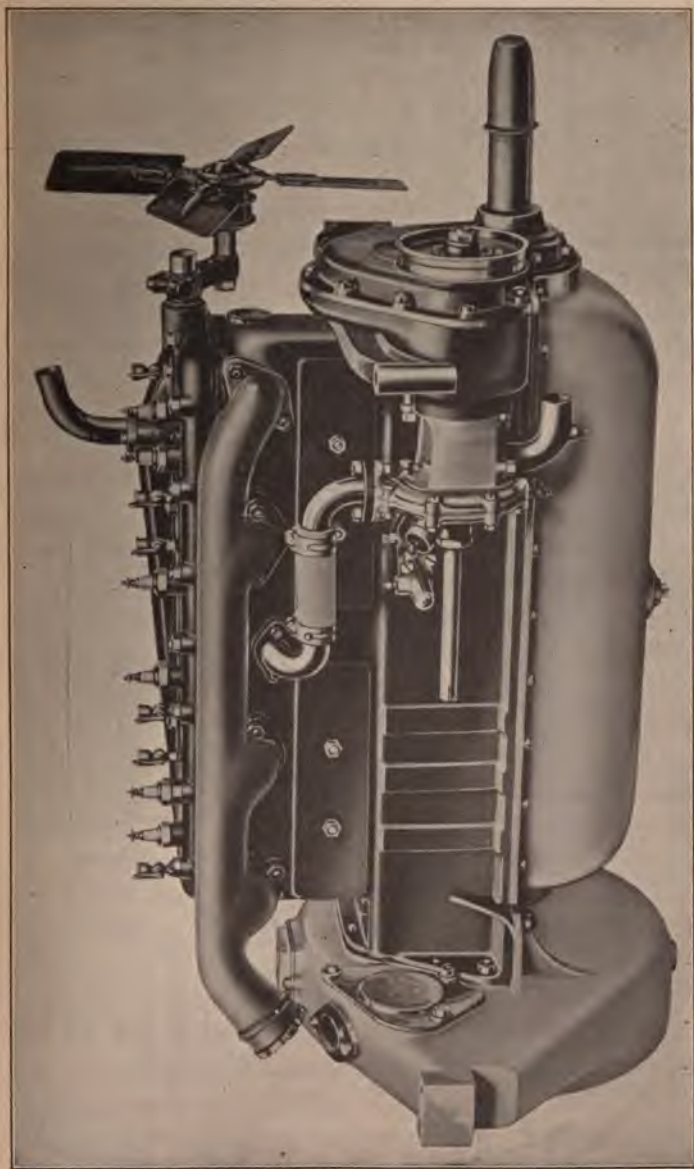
Six-cylinder automobile engine complete. This type of engine is used on many American cars
